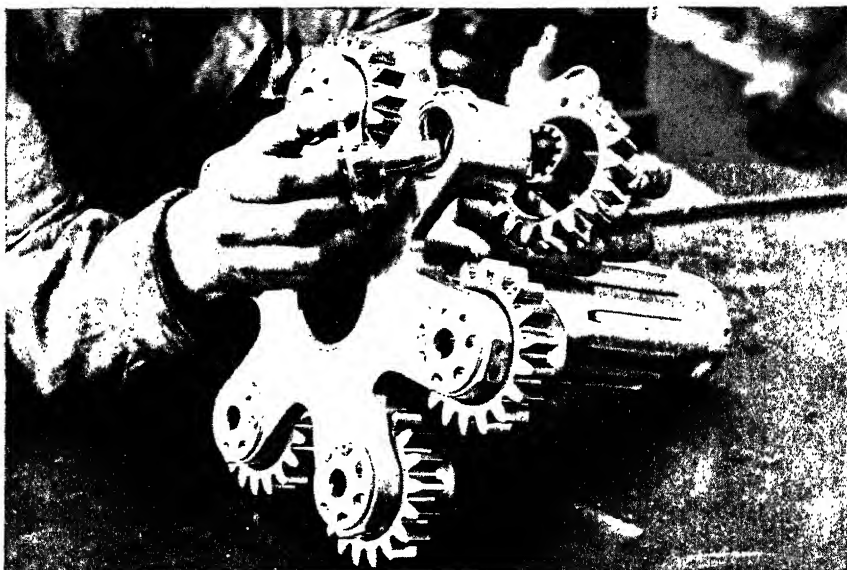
AIRSCREW SHAFT, SHOWING ASSEMBLY OF REDUCTION-GEAR PINIONS
